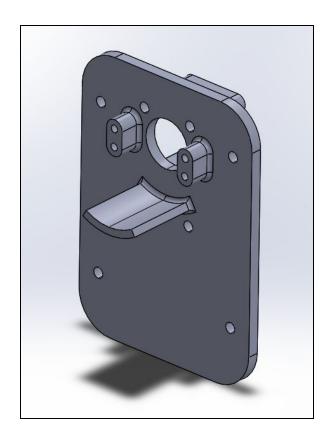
Mount for worm gear motor that controls the sun/moon beam, designed for 3D printer
